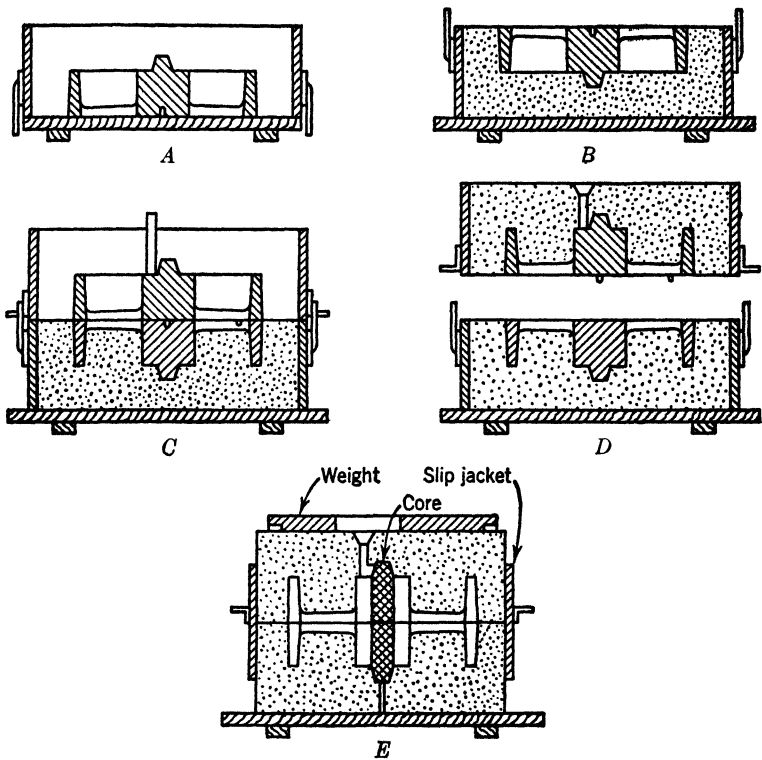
A. Pattern and flask about to be molded. B. Drag rolled over. C. Cope half of pattern and flask in position. D. Cope being drawn. E. Completed mold.
